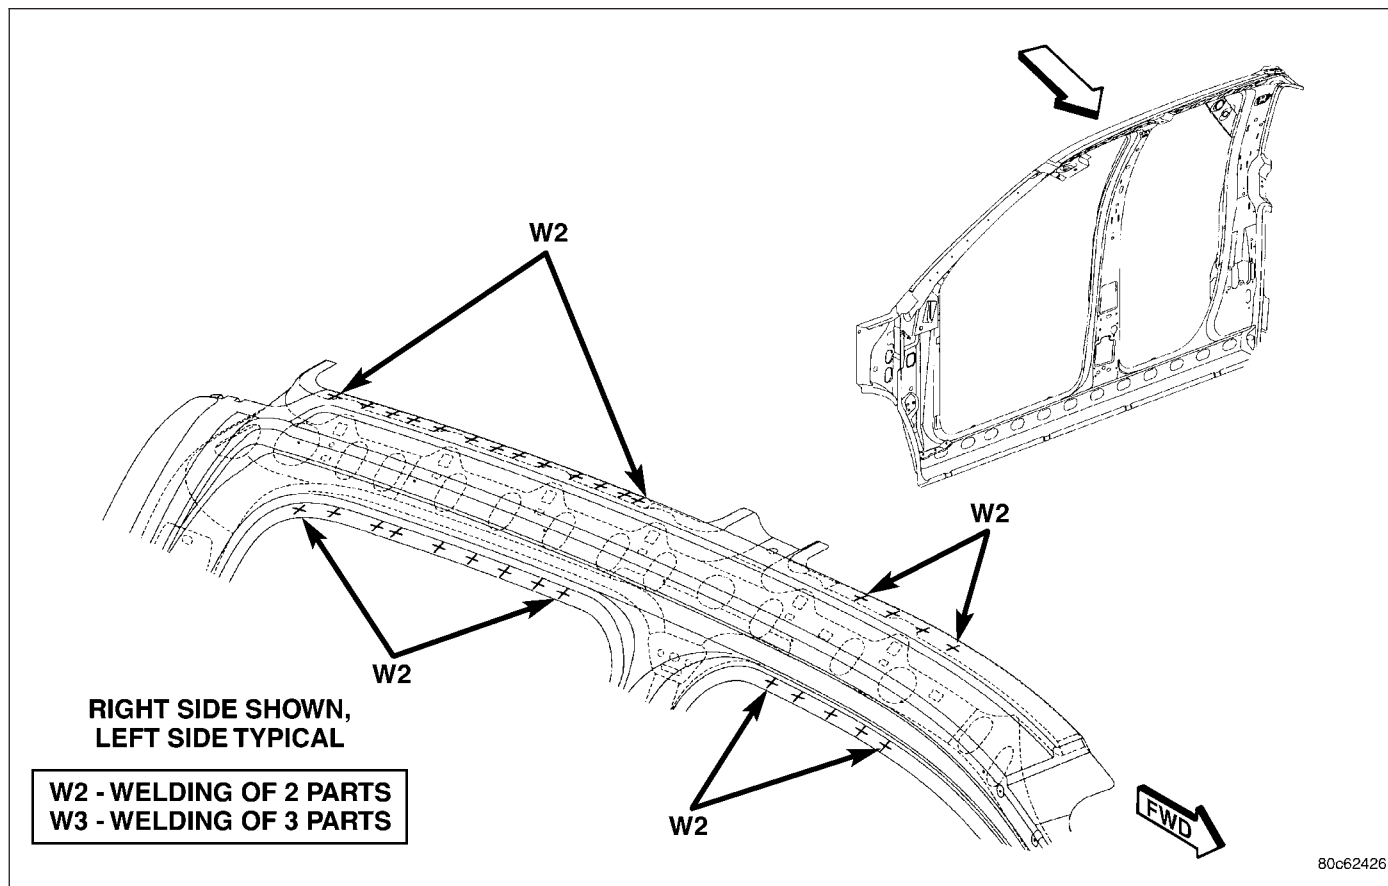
OUTER BODY SIDE APERTURE - QUAD CAB
